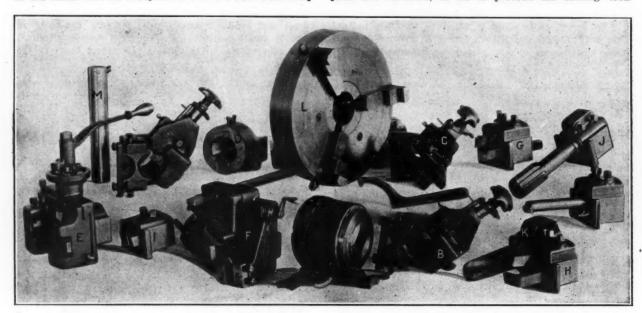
Some of the Tools and Attachments Used on the New Pratt & Whitney Turret Lathe.
